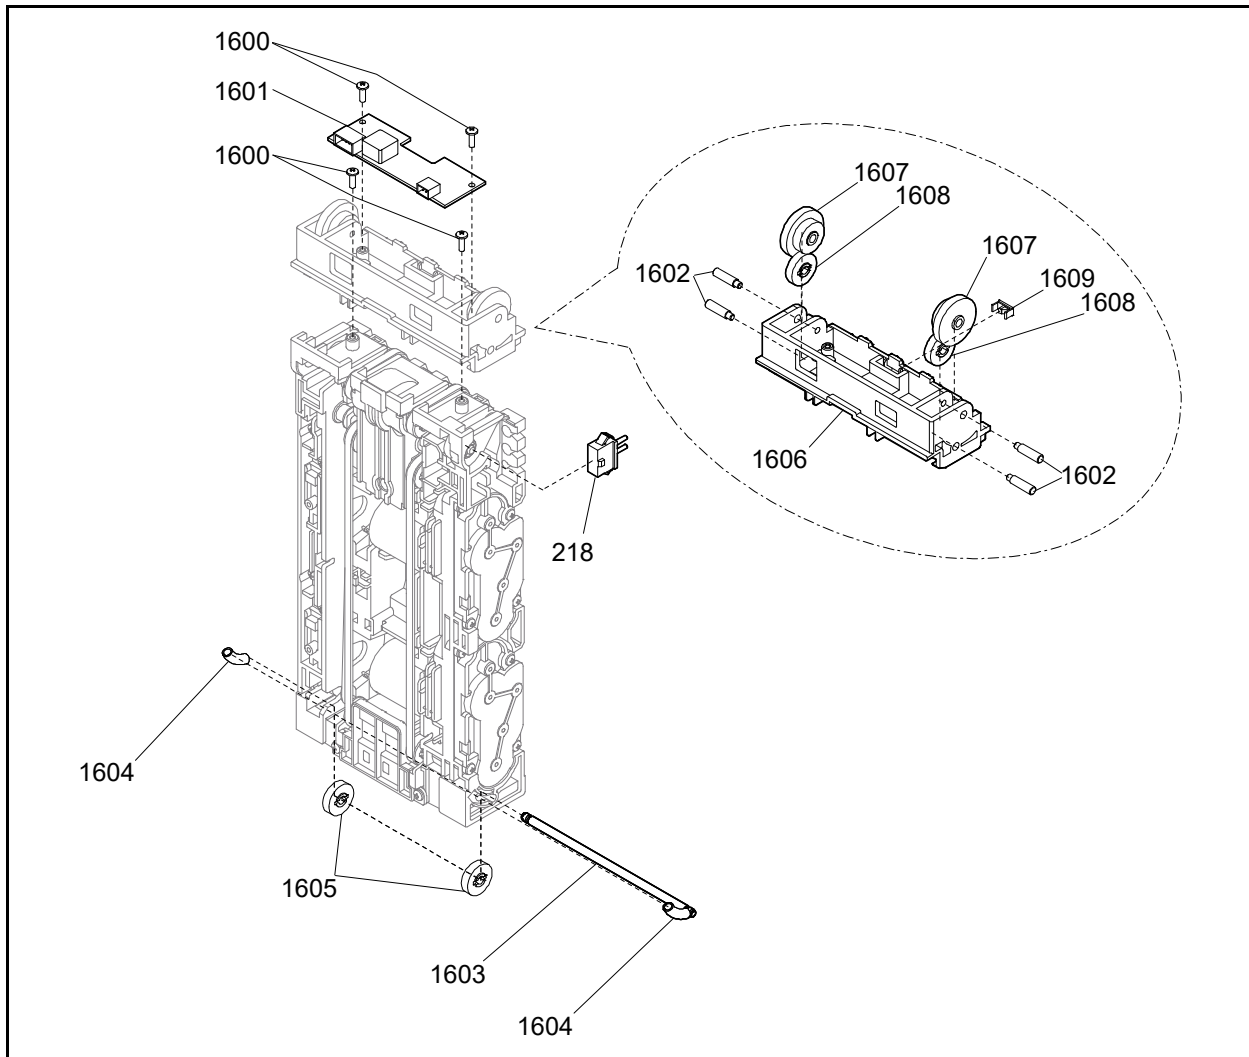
iPRO-RC Rear Transport Assembly 6 Exploded View
